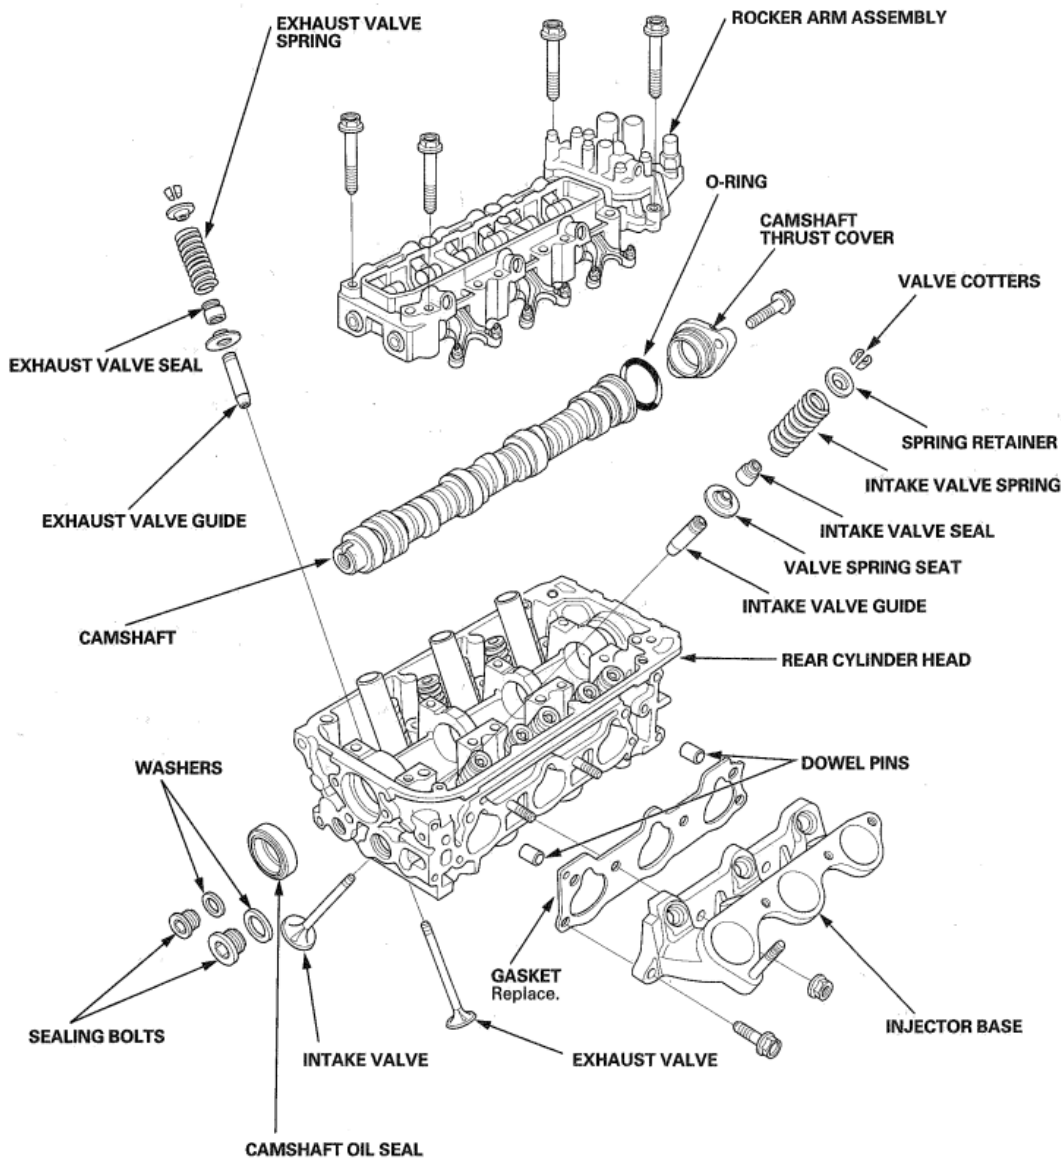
Identifying Rear Cylinder Head Replacement Components
